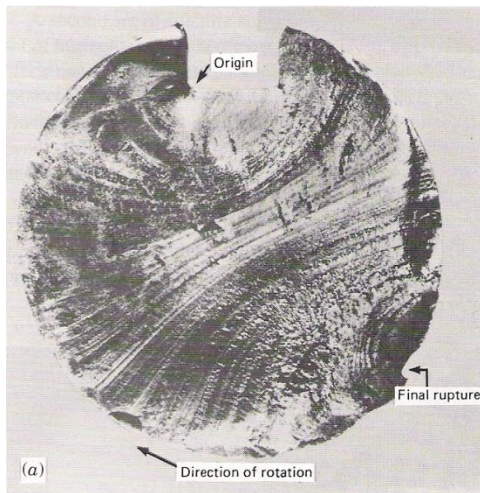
Image of a fracture surface showing beach markings. [4]
